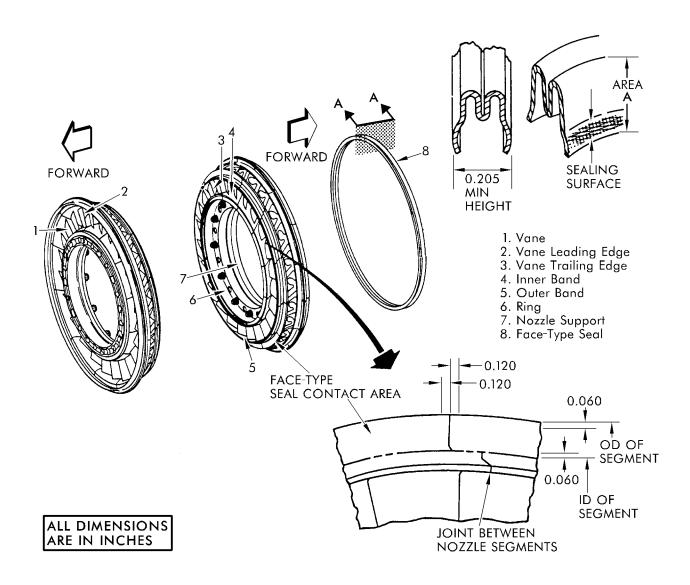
Stage 1 Nozzle Assembly (Typical) and Face-Type Seal; Inspection
